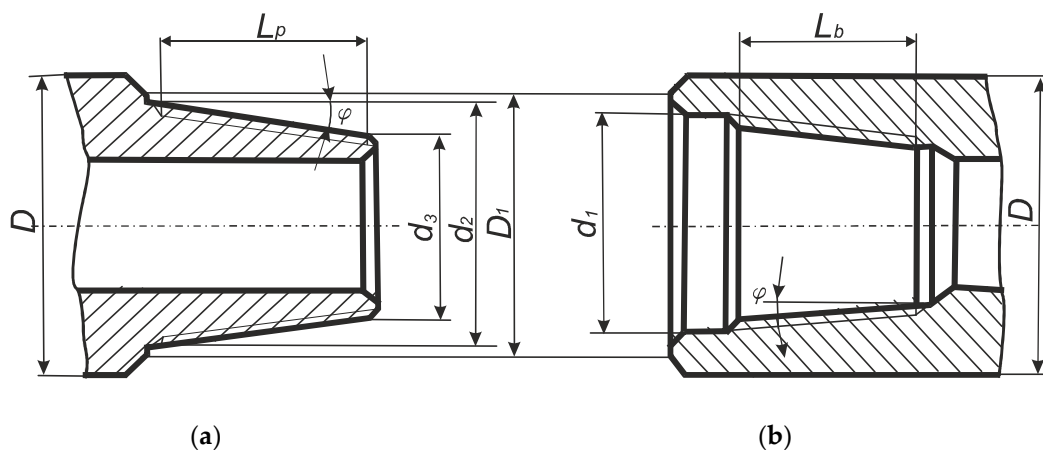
Drawing of the drill-string tool-joint parts of the pin (a) and the box (b): φ is the taper angle, D is the outer diameter of the tool-joint tapered thread, D_1 is the diameter of the tool-joint tapered thread at the end section, d_1 is the diameter of the cylindrical twist, d_2 is the diameter of the larger base of the cone, d_3 is the diameter of the smaller base of the cone, L_p is the length of the threaded part of the pin, L_b is the length of the threaded parts of the box.
